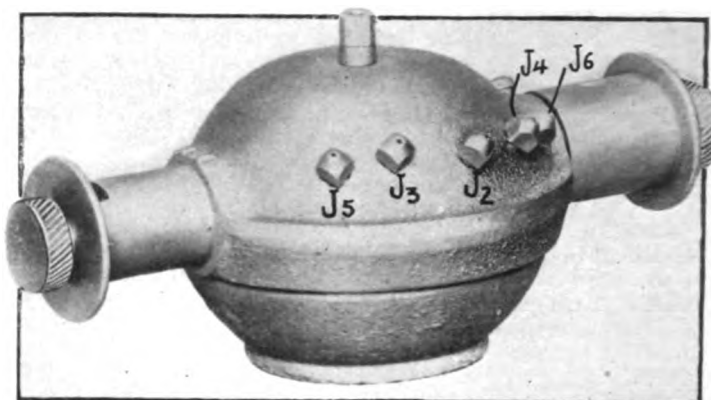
Float chamber of the A. B. C. automatic carbureter
